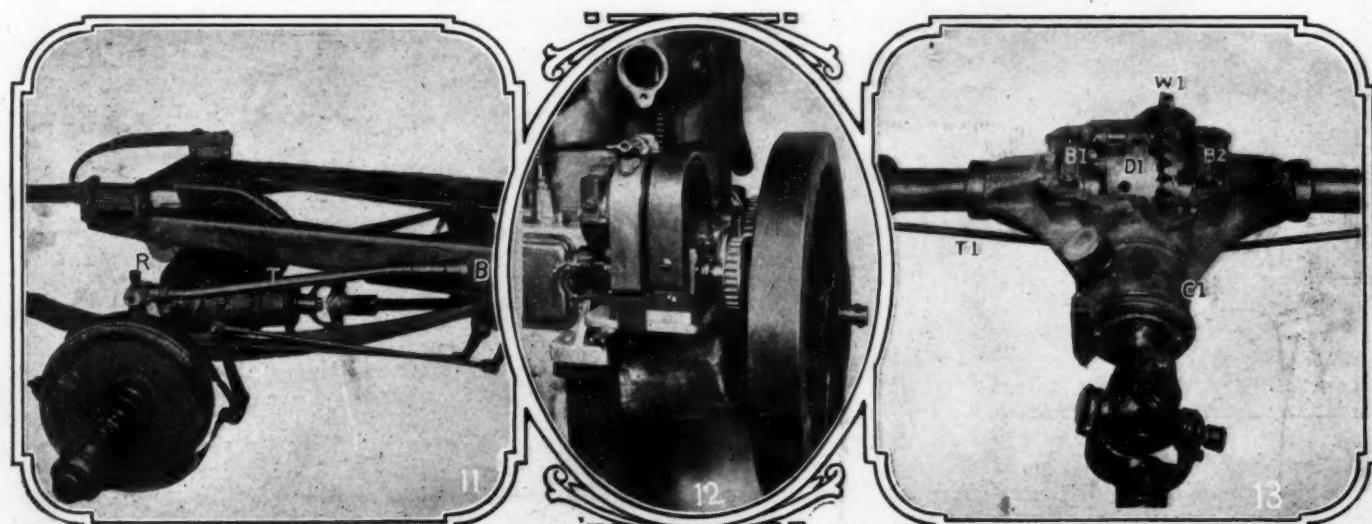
View of the brakes of the Maxwell Special with the wheel removed showing the jackshaft, torque rod and spring suspension
